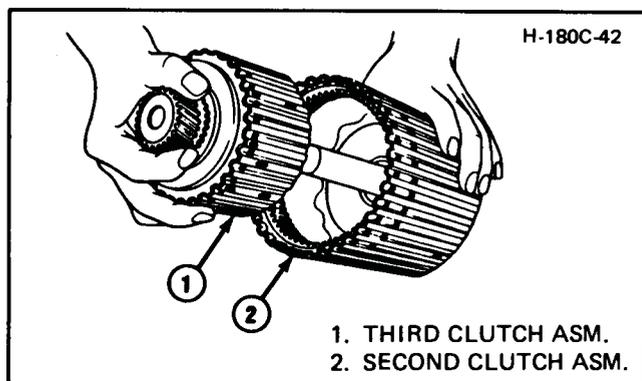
C-54 Installing Third Clutch Assembly Into Second Clutch Assembly
